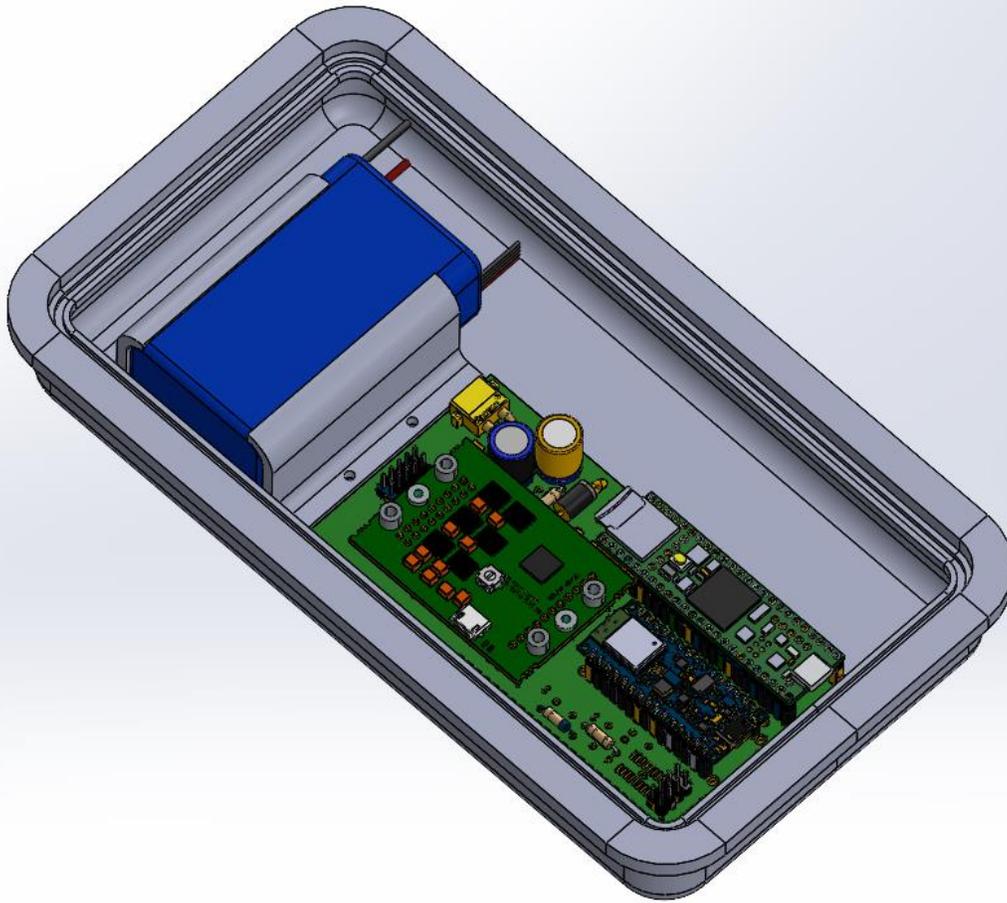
Assembly of our Battery/ PCB Protective Covering
